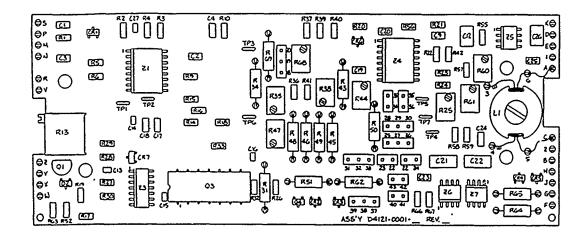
A Vanzetti Company Printed Circuit Board Which is Routinely Soldered by Laser-beam Reflow.
